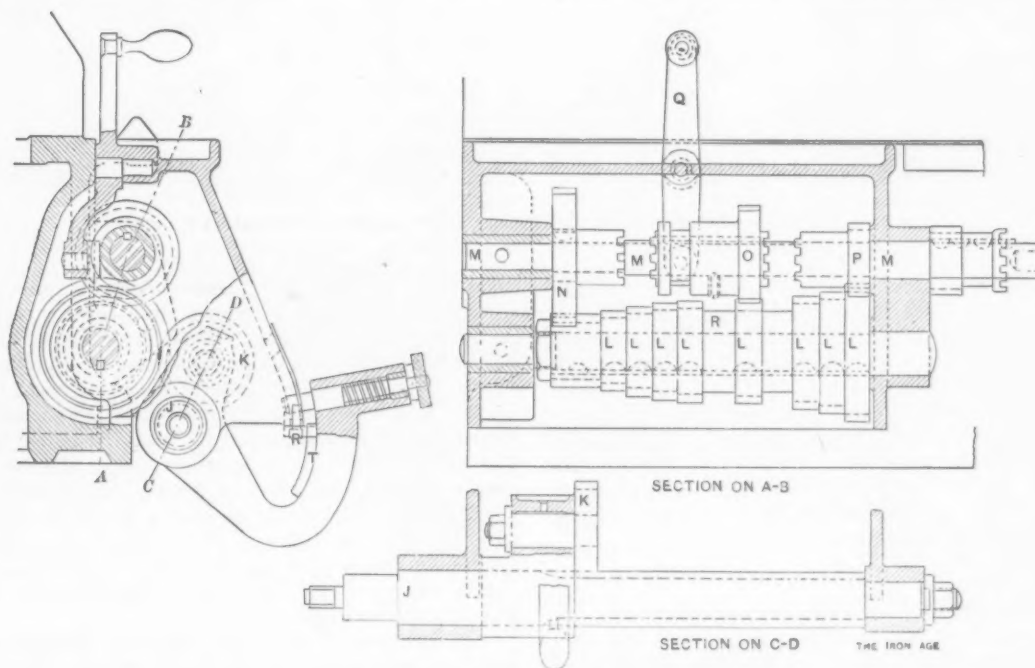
Detail of the Flather Change Gear Feed Mechanism.
